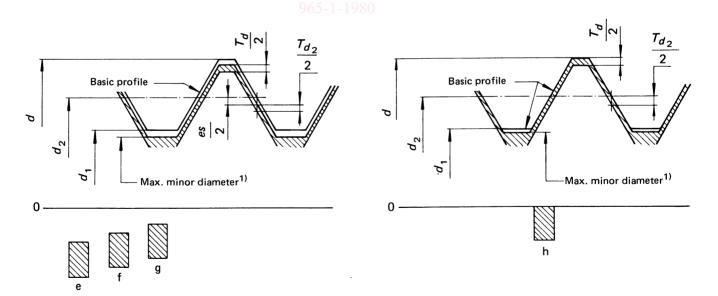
Bolt threads with tolerance positions e, f and g
